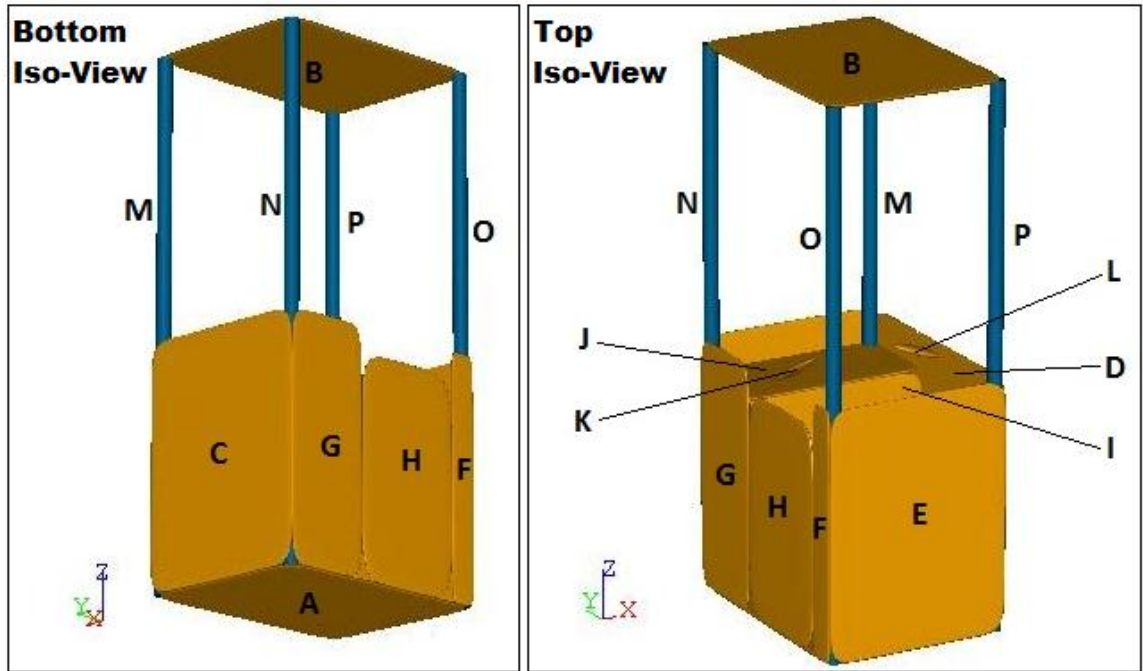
Isometric view of SQM with component labeling; (A) floor, (B) overhead guard, (C) left side outer wall, (D) back outer wall, (E) right side outer wall, (F) right side door wall, (G) left side door wall, (H) door, (I) inner compartment wall, (J) control panel, (K) tiller, (L) MFCL, (M-P) posts 1-4
